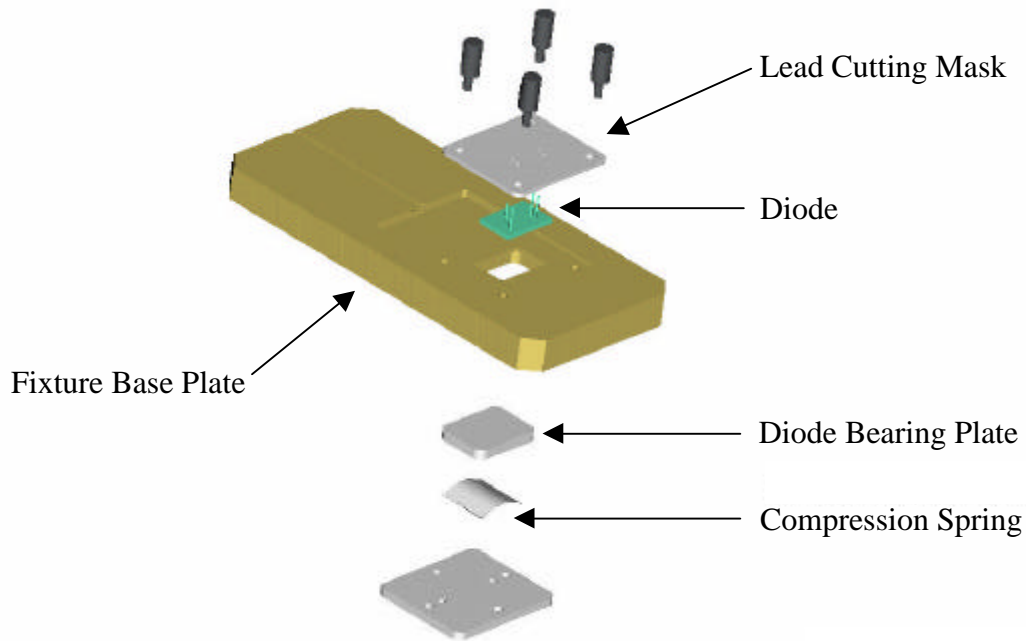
Exploded View of Tooling Configured to Cut PIN Diode Leads
